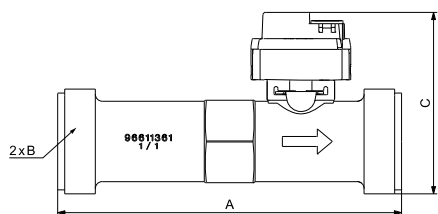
Dimensions, VFS, 10-200 l/min, without adapter
